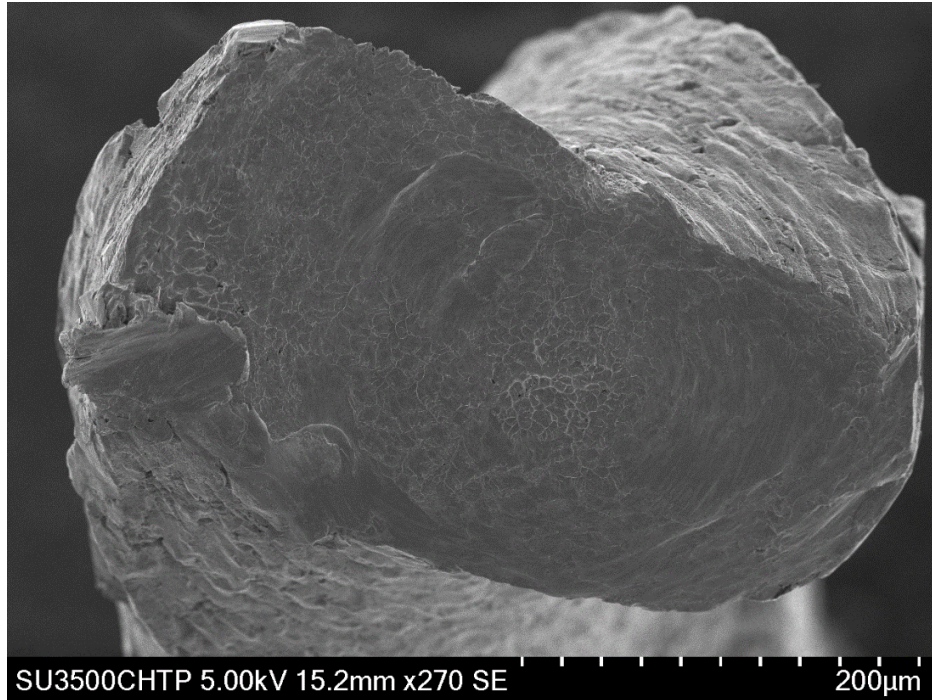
Fractured surface of a HyFlex EDM file after 75% fatigue preloading and failure by shear stress.
